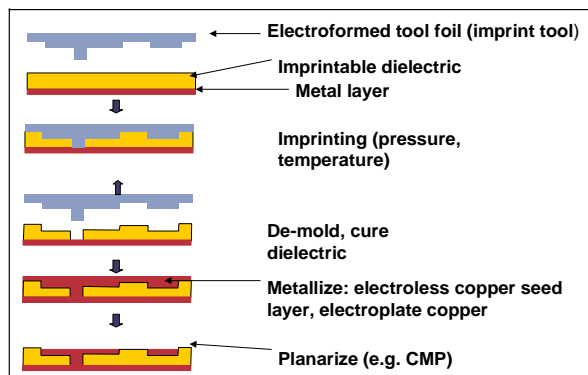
Principle of Imprint Technology (source: George Gregoire, Dimensional Imprint Technology, Inc.)
